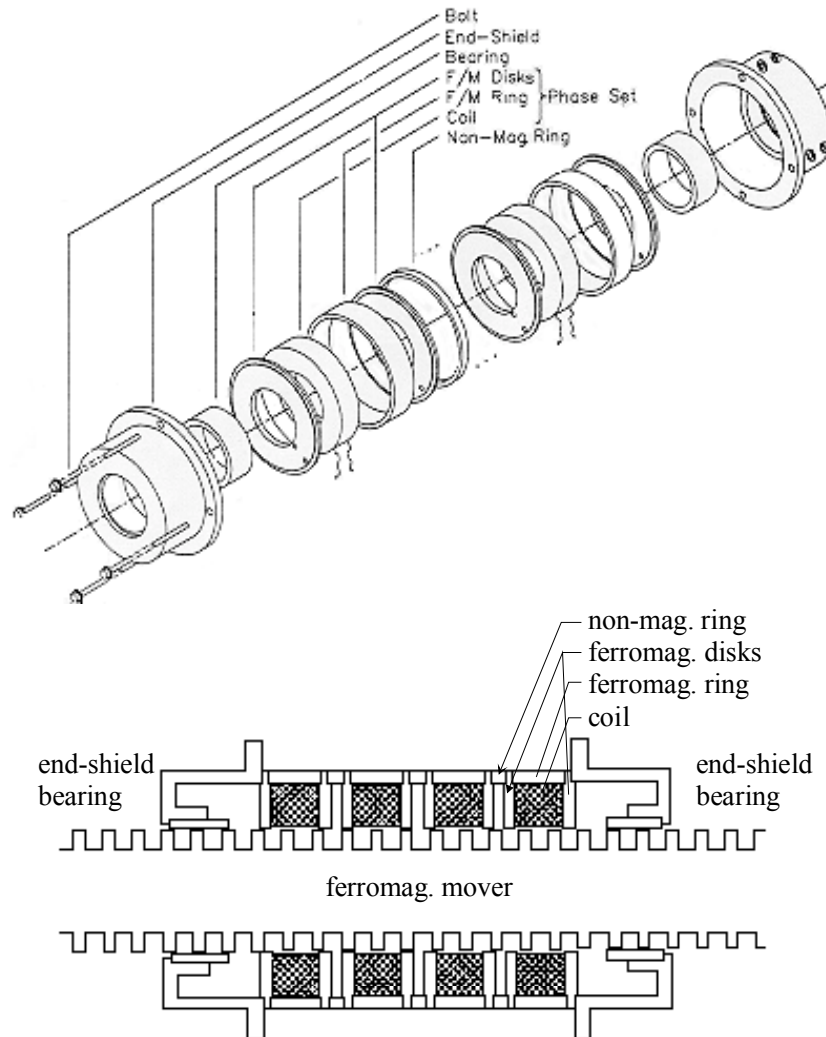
A tubular four-phase linear SR-motor (Corda, Skopljak, 1993. p. 536). Upper picture shows the phase sets and their assembly. Lower picture shows a through sectional cut with the ferromagnetic mover.
